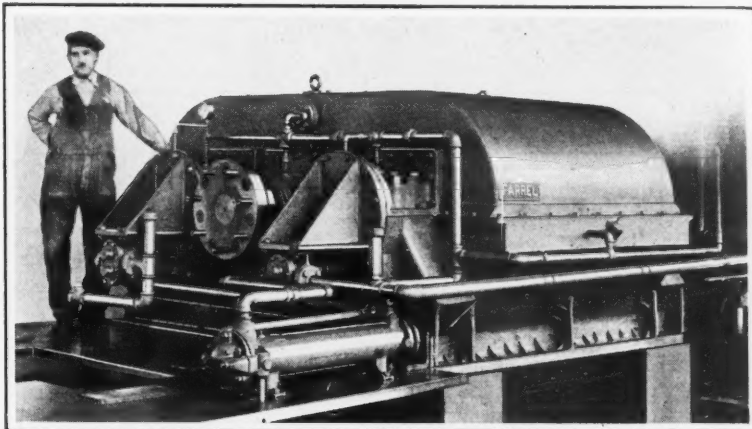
Farrel-Birmingham 600 H.P. Enclosed Gear Drive for a Dredge, Designed for Operating Completely Immersed in Water
